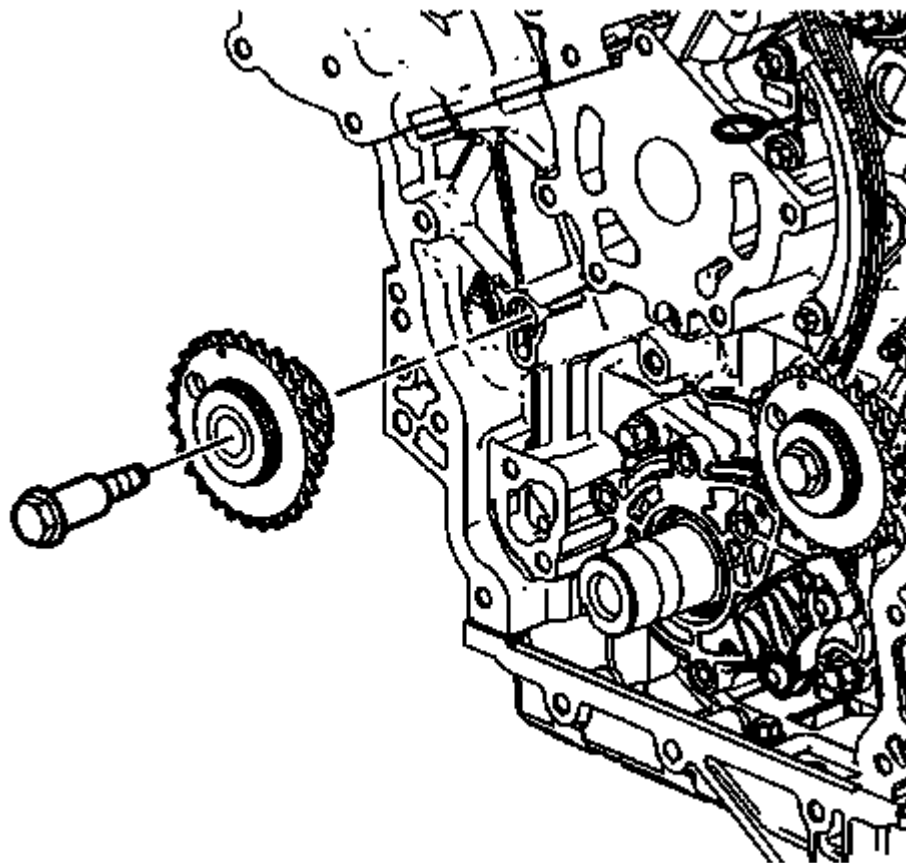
View Of Right & Left Camshaft Intermediate Drive Chain Idlers
